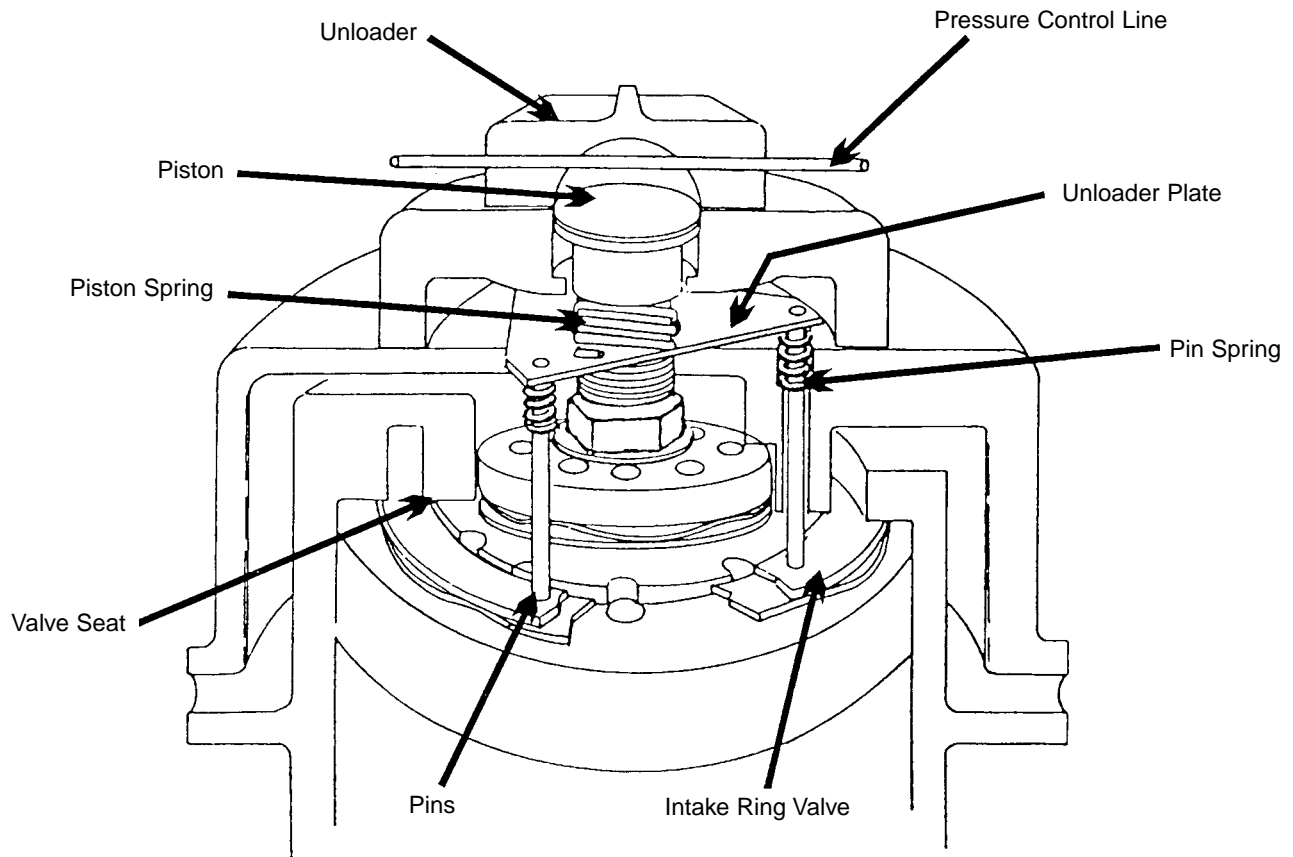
Concentric Valve Airhead Cutaway (Courtesy of Ingersoll-Rand)
